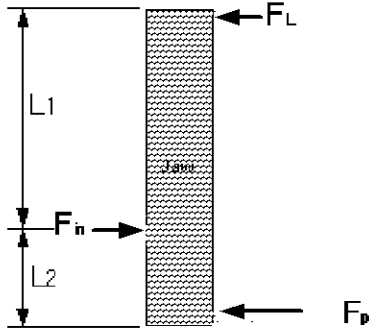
Schematic drawing of forces acting on the jaw by roller, locker and pad
